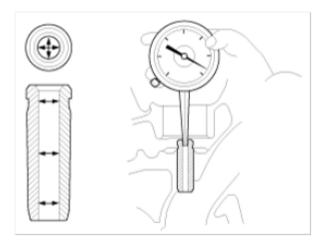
Measuring Valve Guide Inner Diameter Using Caliper Gauge Courtesy of HYUNDAI MOTOR AMERICA
